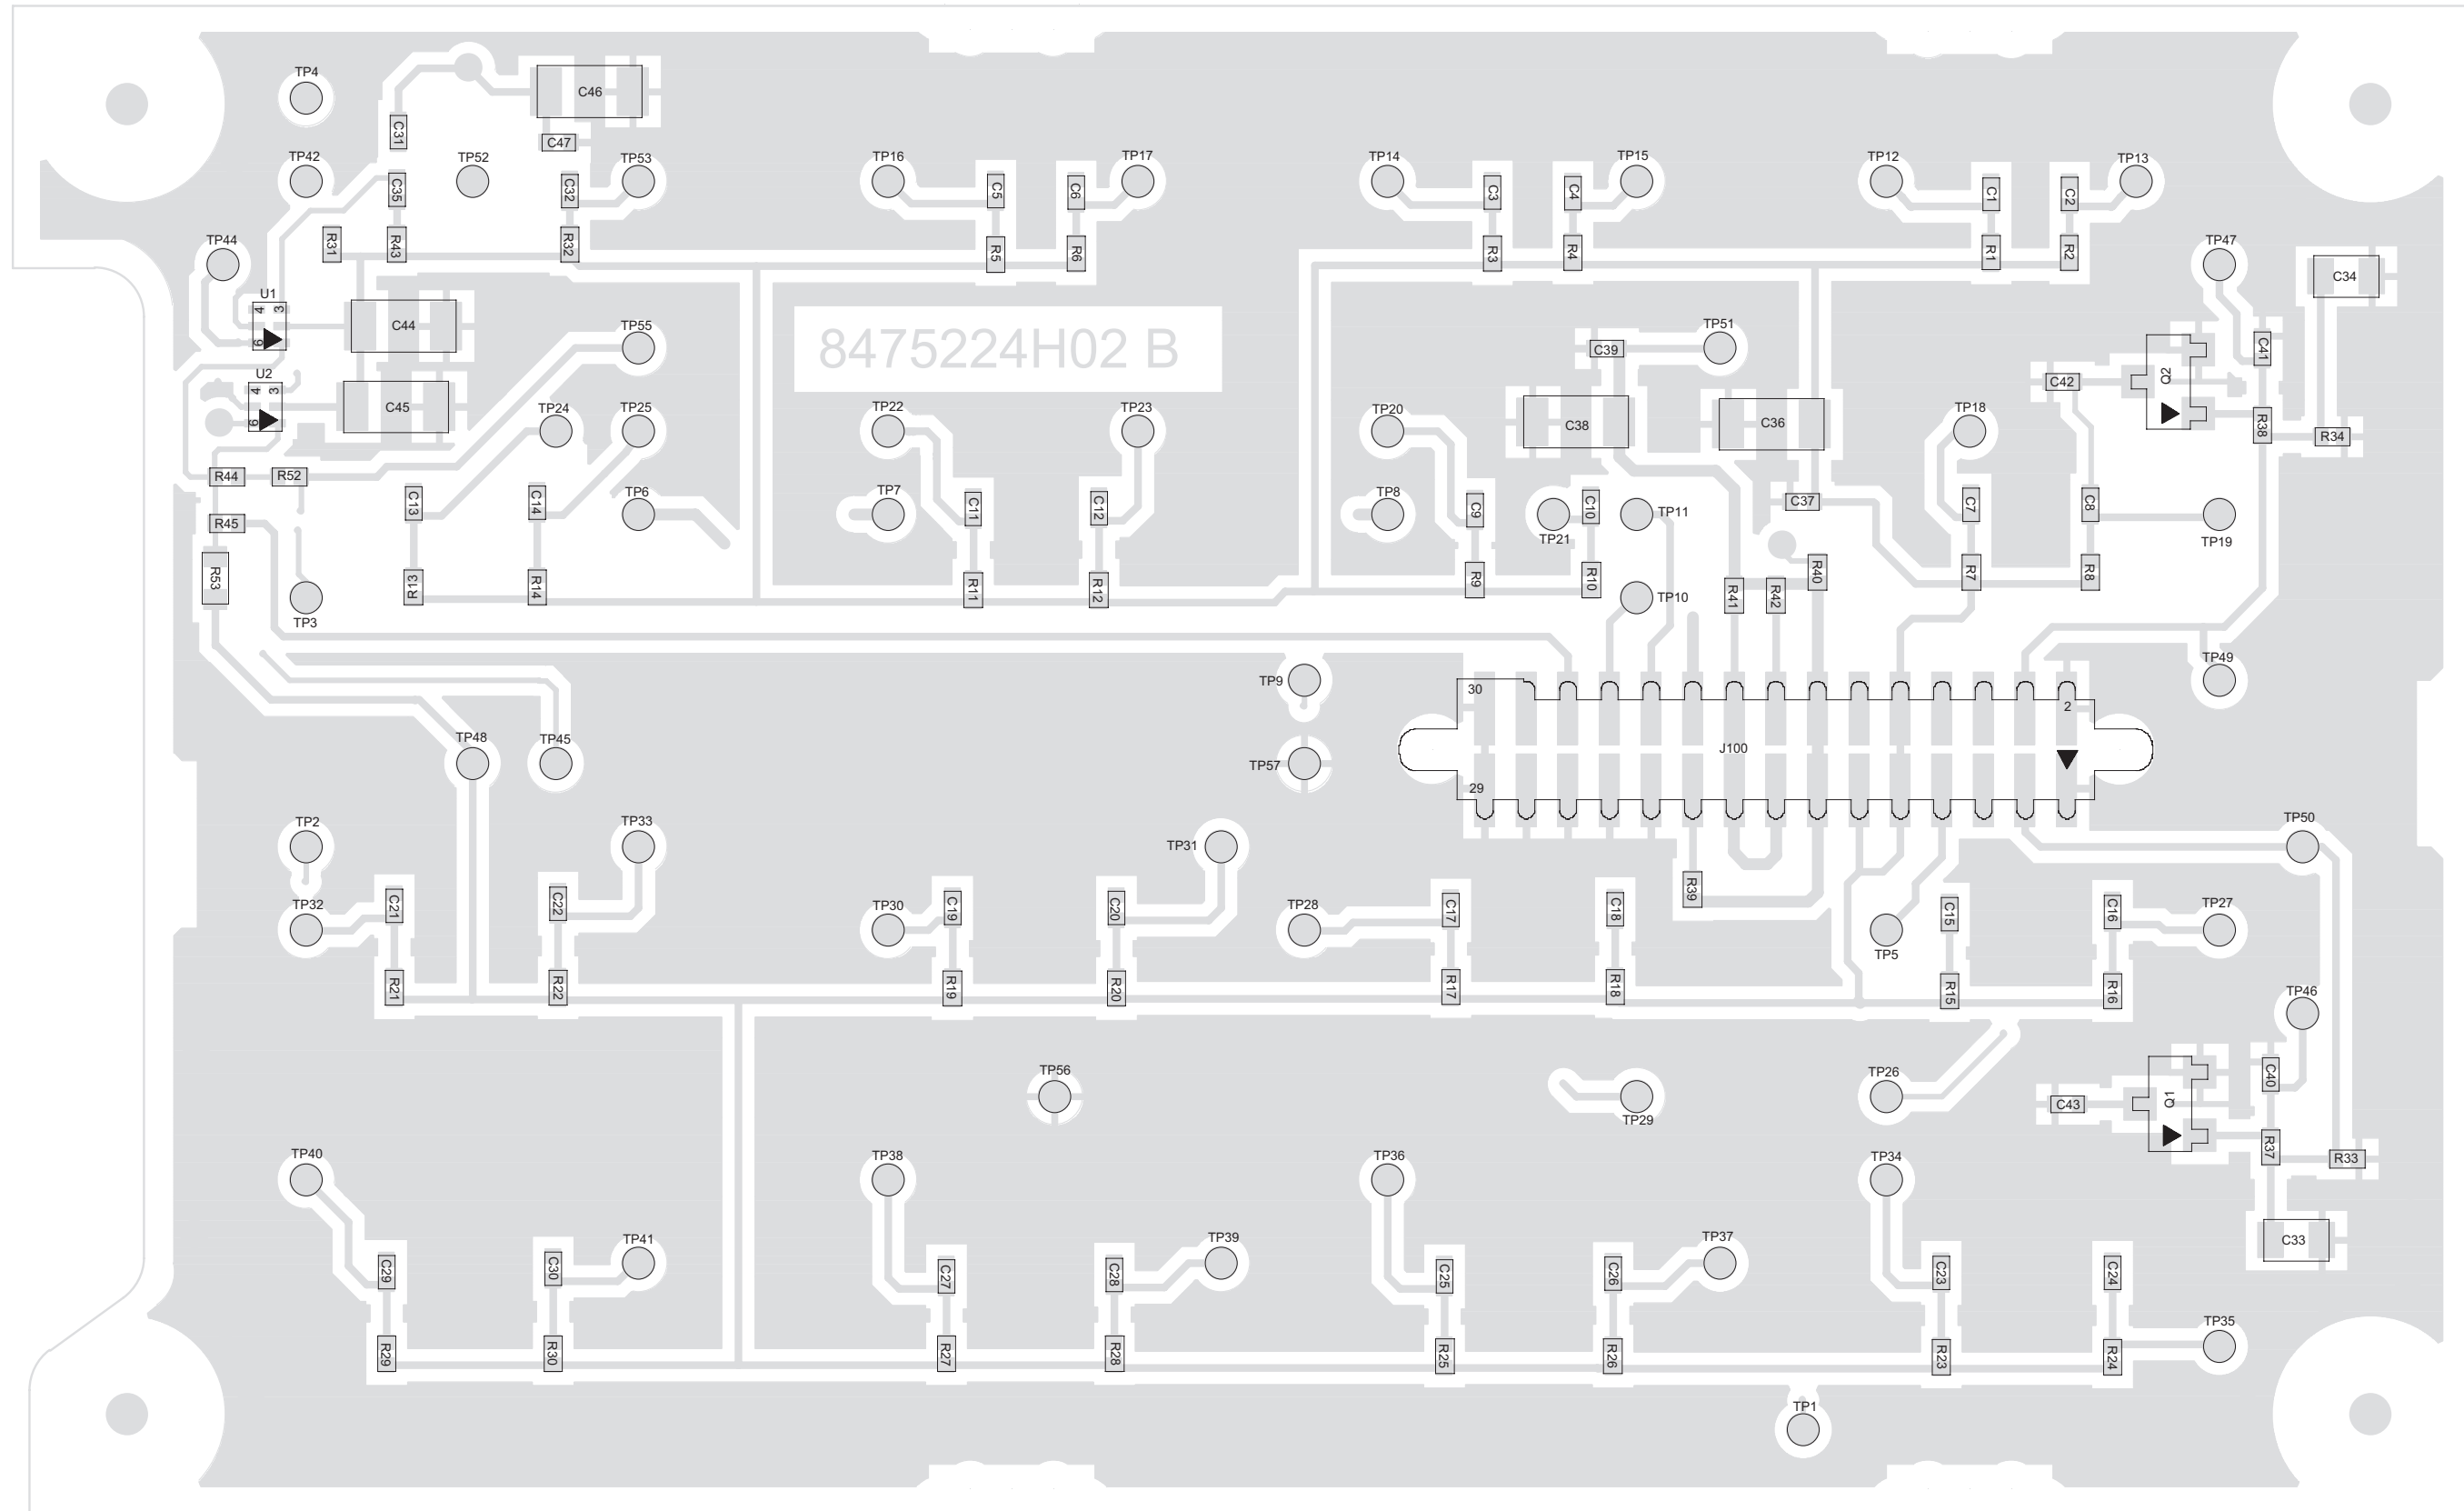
PPLN1693A Keypad Circuit Board Layout - Side 2
